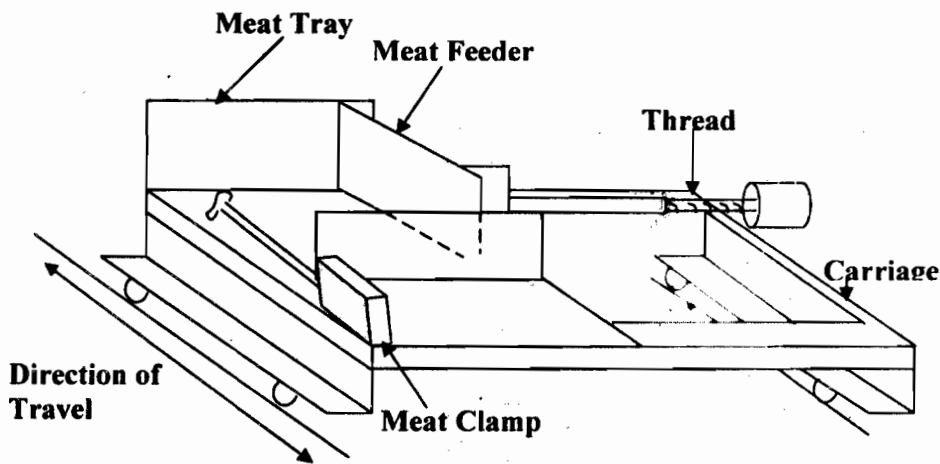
Assembly of Meat Feeder, Meat Clamp, and Tray on The Carriage
